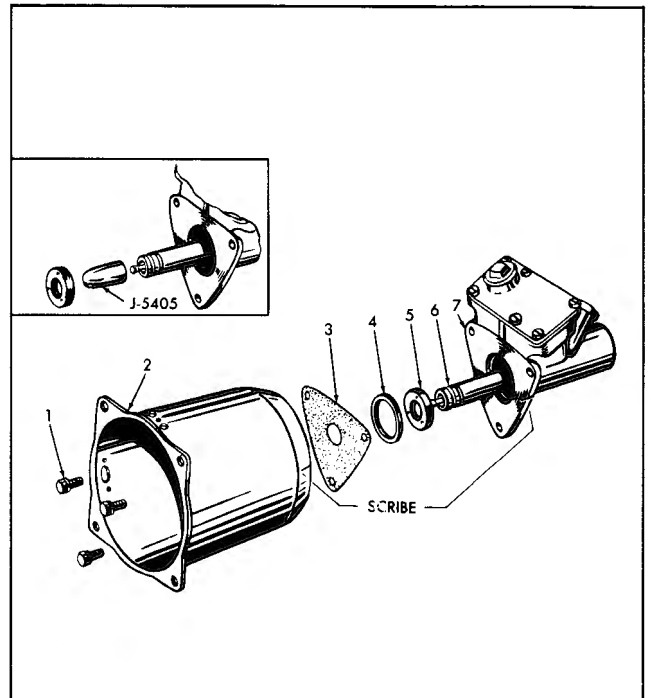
Removal of Vacuum and Hydraulic Cylinder
